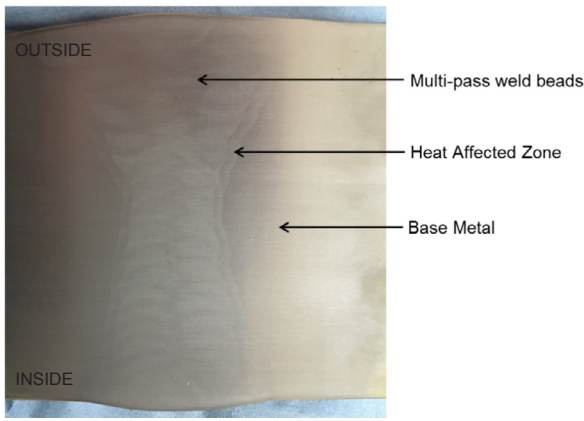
Weld macrograph following polishing and etching the surface of cross-weld extracted slice.
